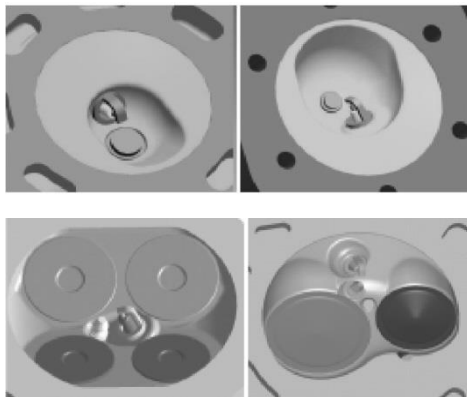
Examples of the typical construction of cylinder head of ADDI system engine:
